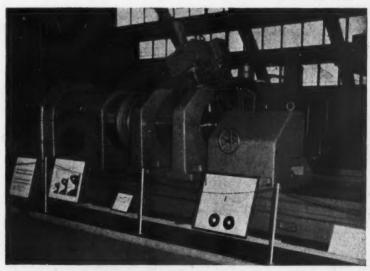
General view of the Schless type RFw 10 precision horizontal gear and pinion hobbing machine
